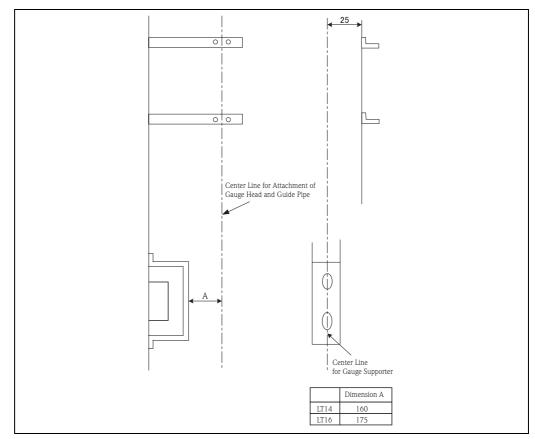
LT14/LT16 Gauge and Pipe Supporters
